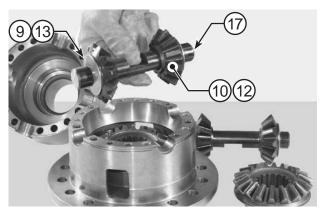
Remove shafts (17), complete with planetary gears (10, 12) and spherical shoulder washers (9, 13).
